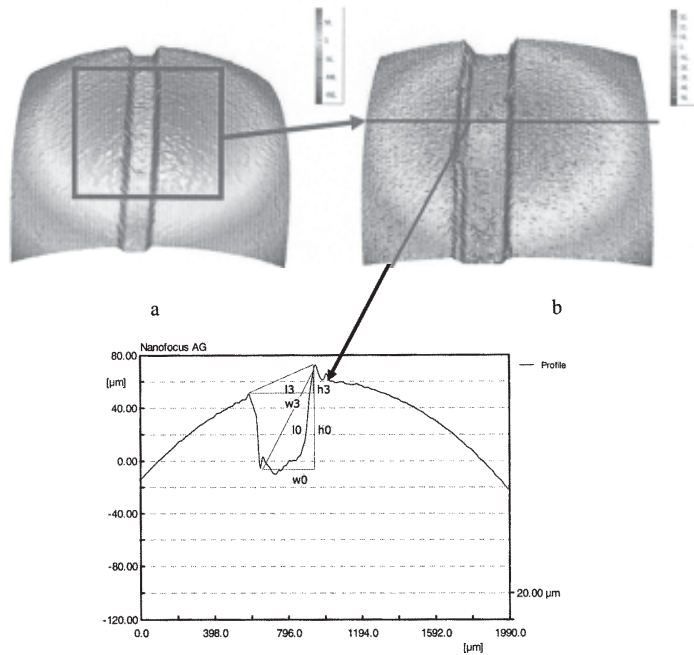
Surface microtopography (a) and transversal profile and dimensions (b) for a 12.7 mm steel ball bearing ball with a surface groove obtained by laser profilometry
